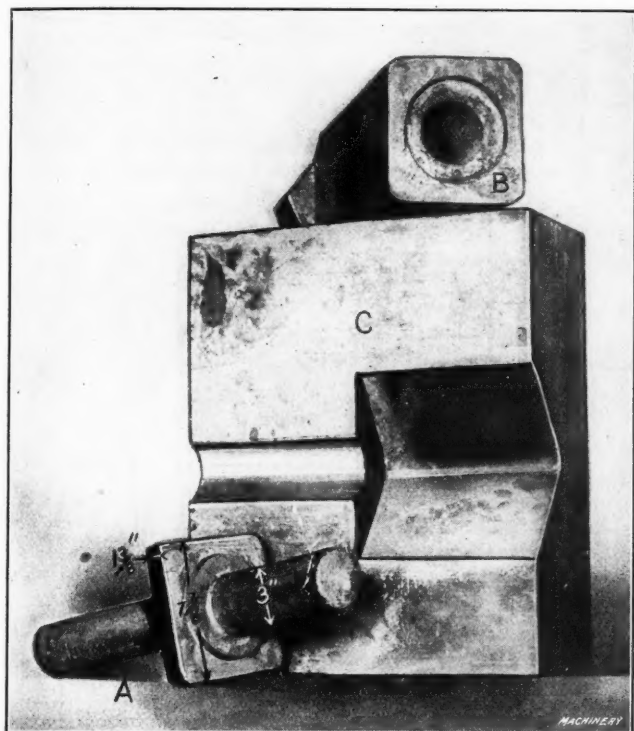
Dies and Tools used in making an Enormous Upset in a 6-inch Ajax Universal Forging Machine
